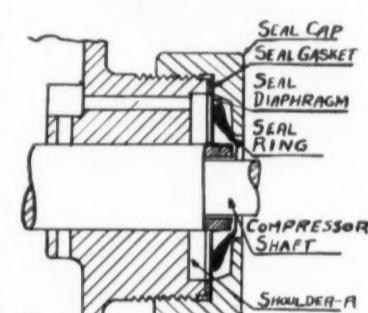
Detailed drawing of Dayton shaft seal retaining nut or seal cap.
